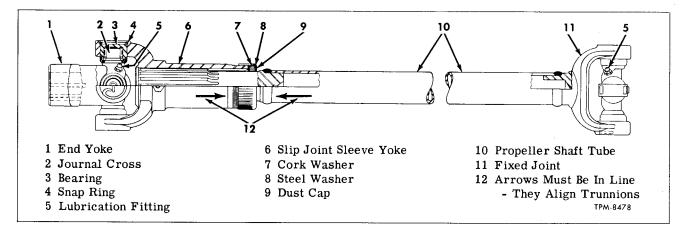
Steering Propeller Shaft (Front Shaft Shown)
